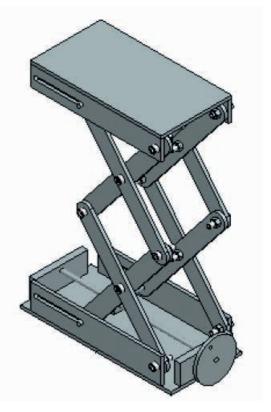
Elevating scissor platform 3D model constructed in NX Siemens
